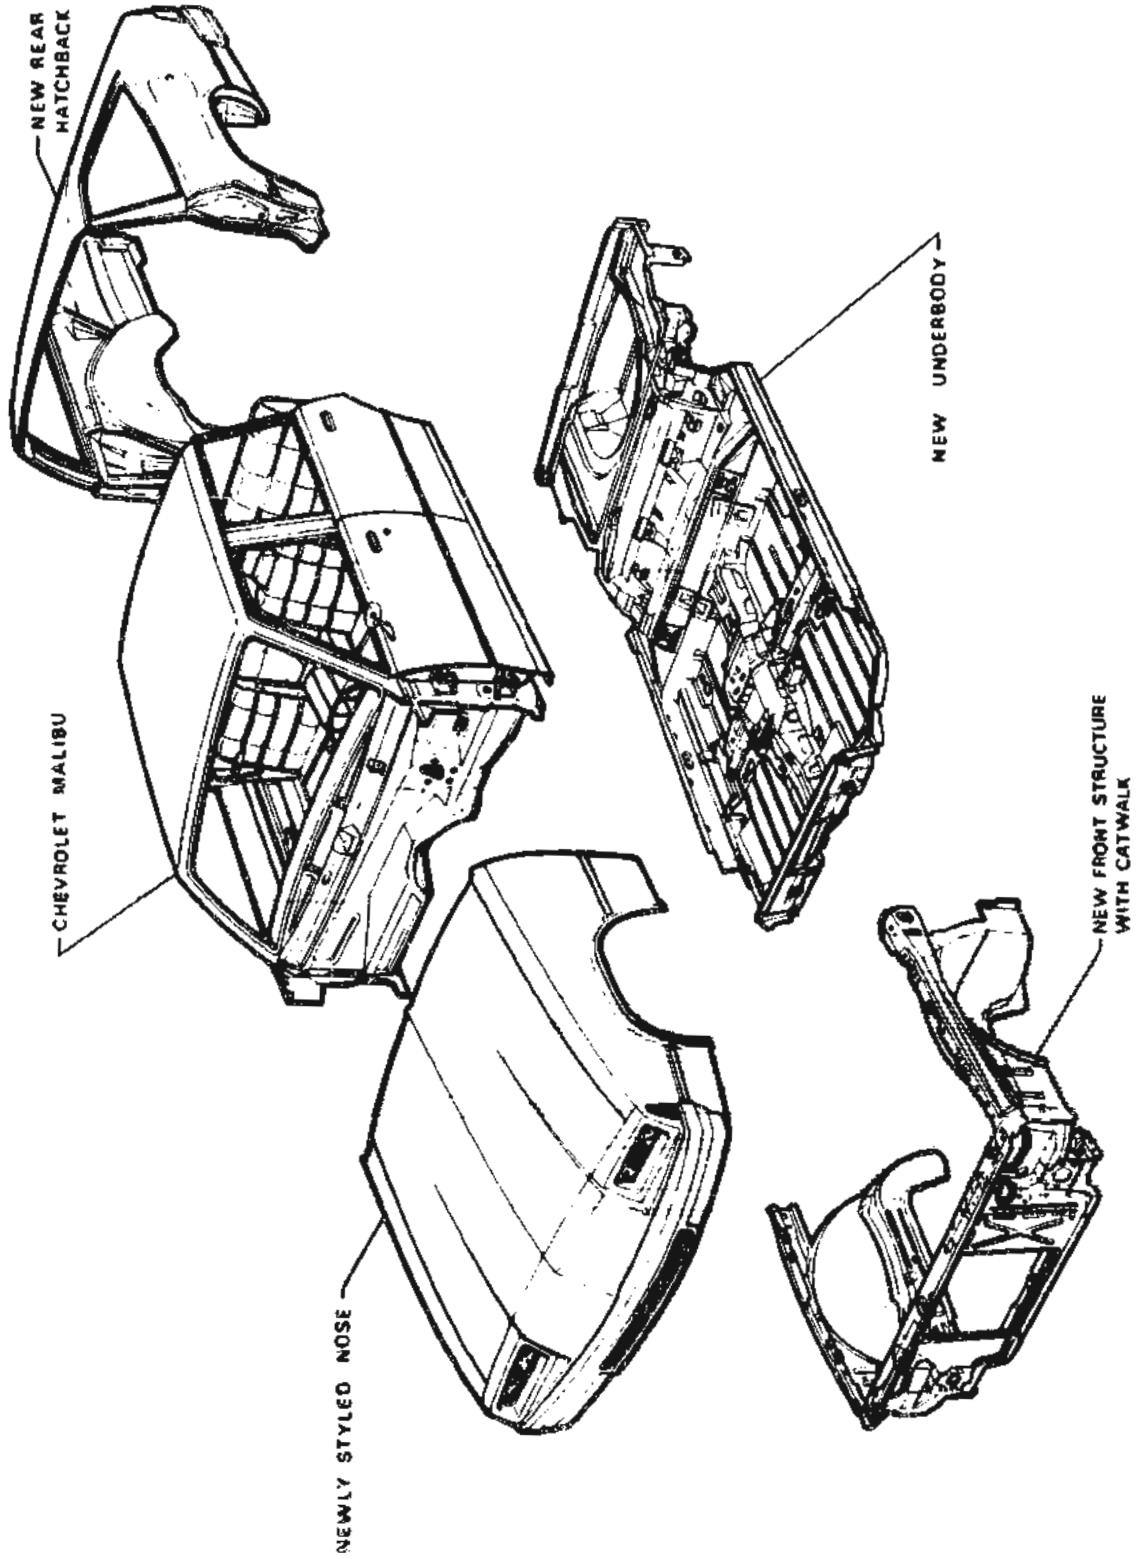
Hybrid Vehicle Body Structure, Exploded View
